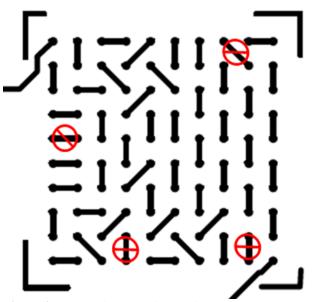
Test Vehicle Drawing, Chip Scale Package (CSP)
